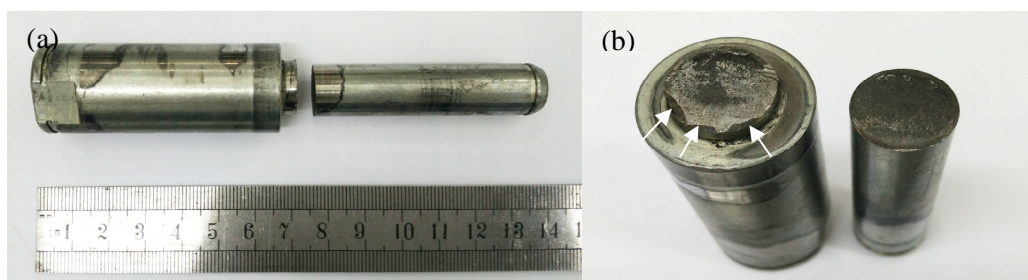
Appearance of stepped pin shaft fracture: (a) overall appearance of broken part of step chain pin; (b) macroscopic morphology of uncleaned fracture.
